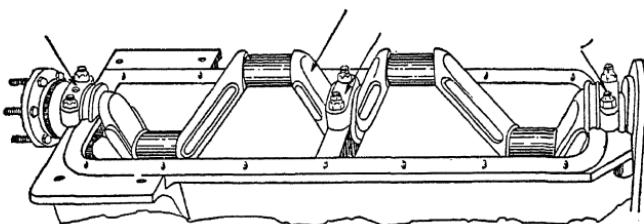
When Removing Crankshaft, the First Step Is to Remove the Main Bearing Caps Indicated by Arrows
